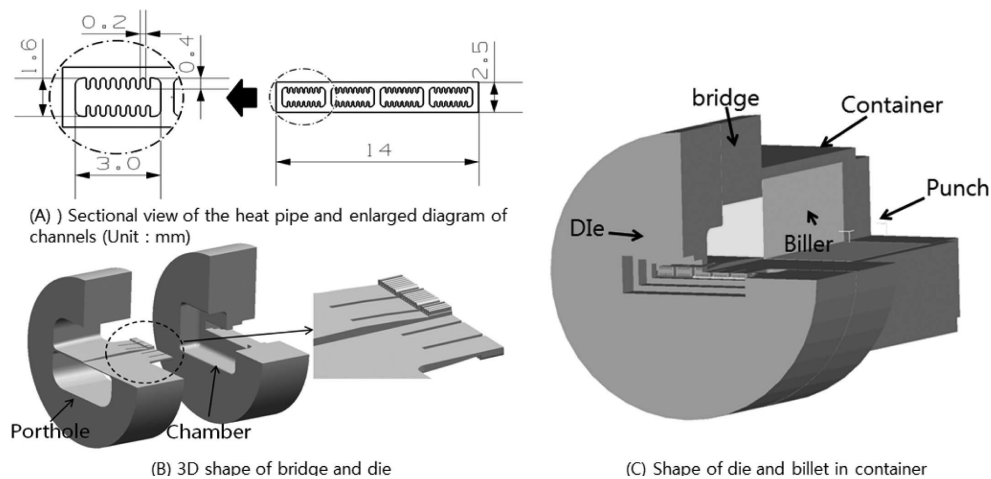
Sectional view of the heat pipe and 3D shape of the mold
